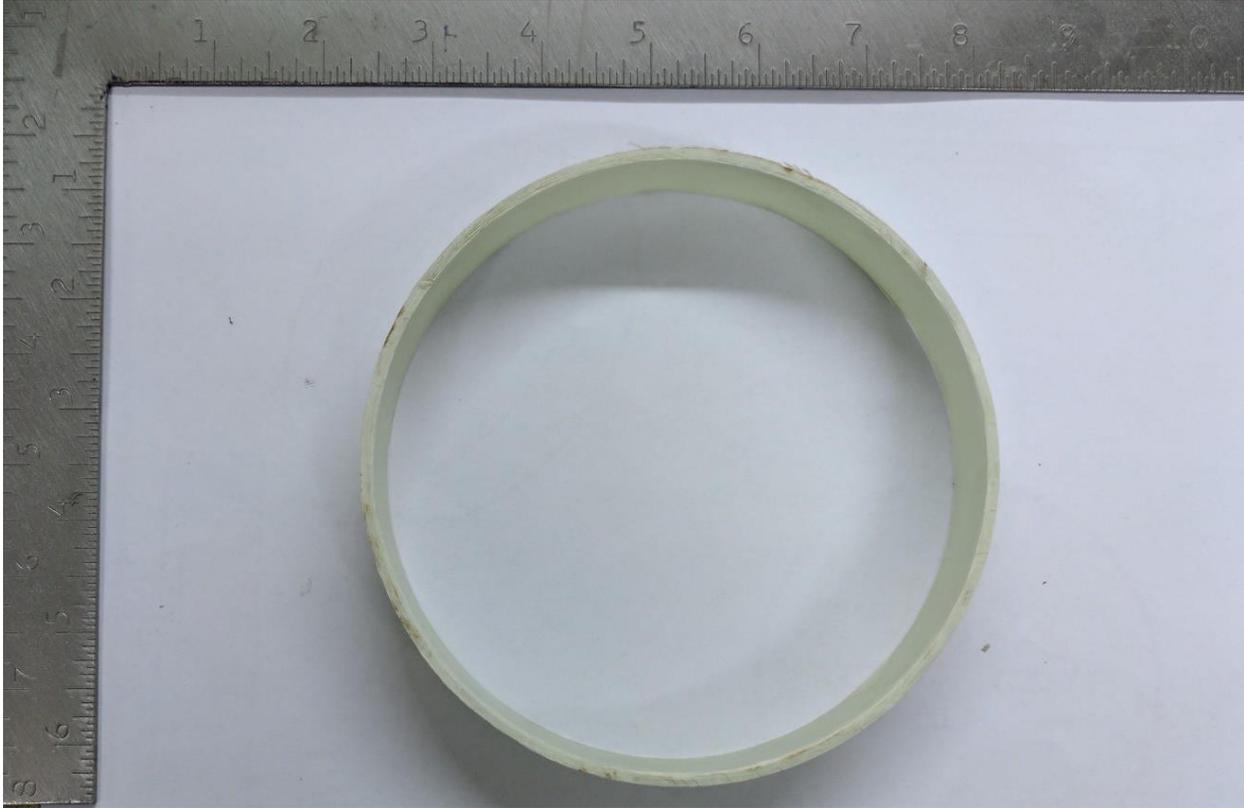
Upper Bulkhead Bottom Coupler Section
